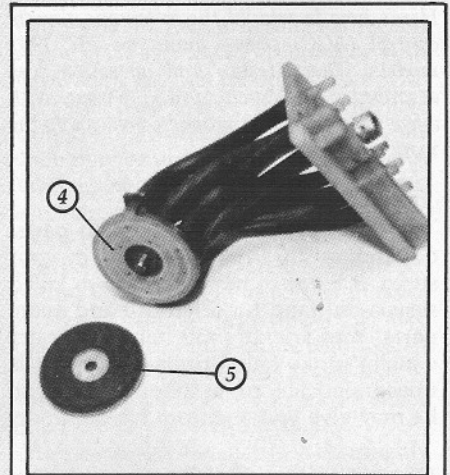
Vacuum Valve Detail: removed from servo, small holes can be seen in vacuum valve (4) and grooves in vacuum valve disk (5).
